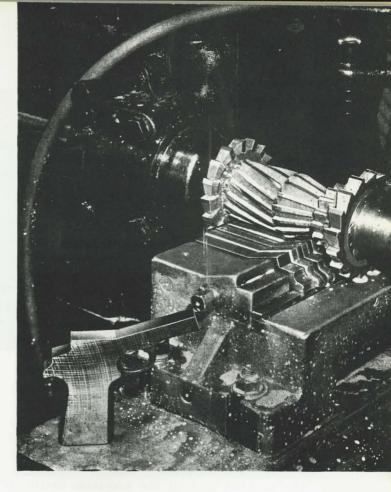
First Milling Operation on Receiver is Profiling of Top Outline. Here Seven Distinct Surfaces are being Milled on Five Blanks in One Operation. Blank with Finished Profile Seen at Left
